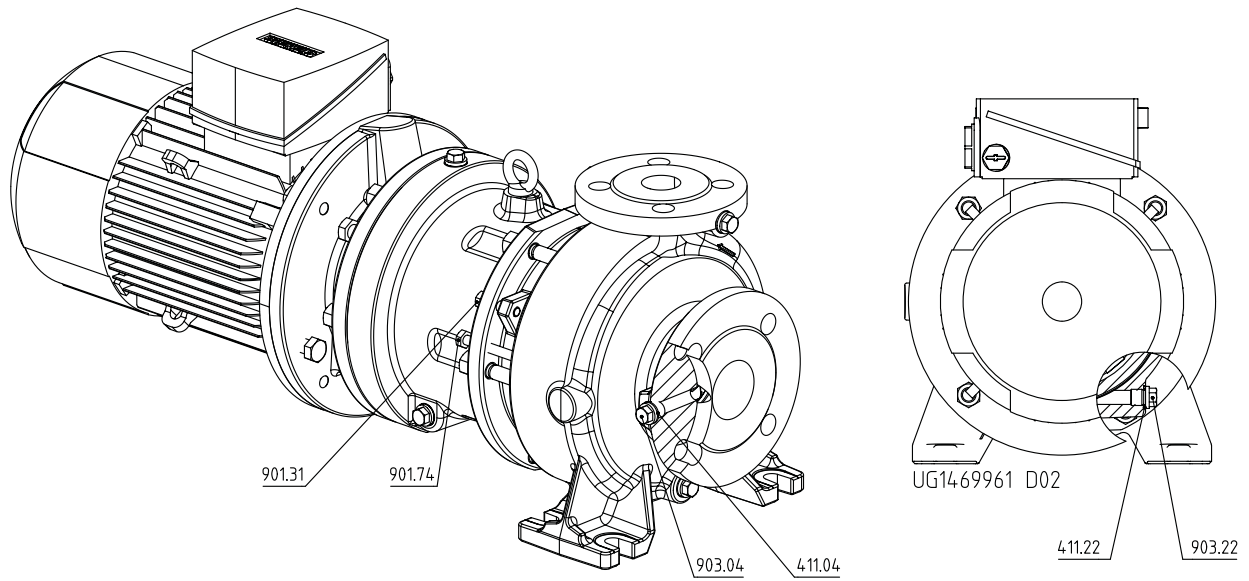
Fitting the discharge cover on the pump casing on designs with bolted cover
